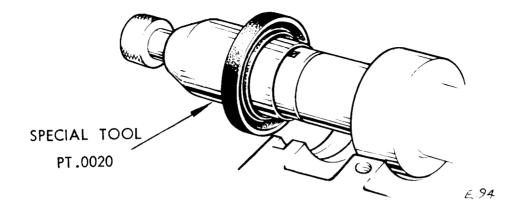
FITTING CAMSHAFT OIL SEAL.
